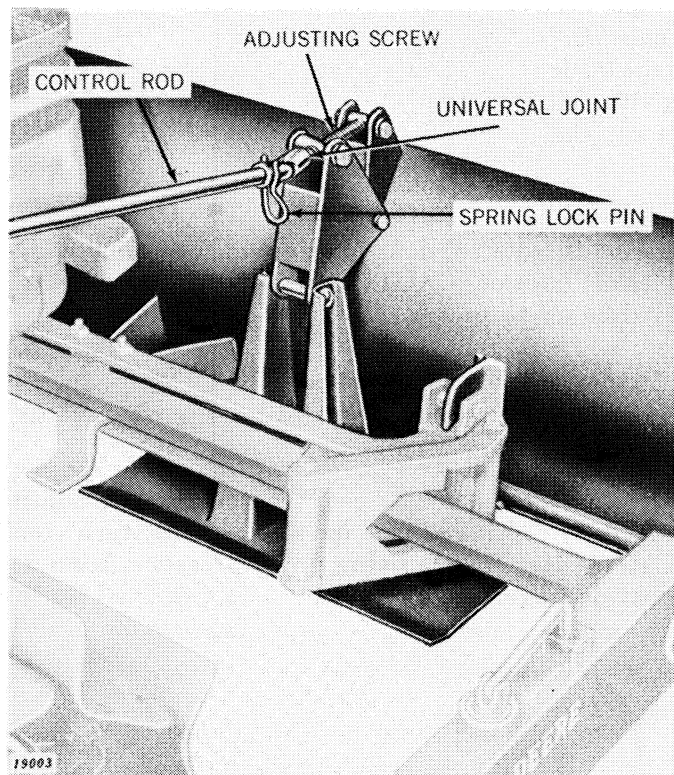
Depth Shoe Adjusting Crank Control Rod Installed
